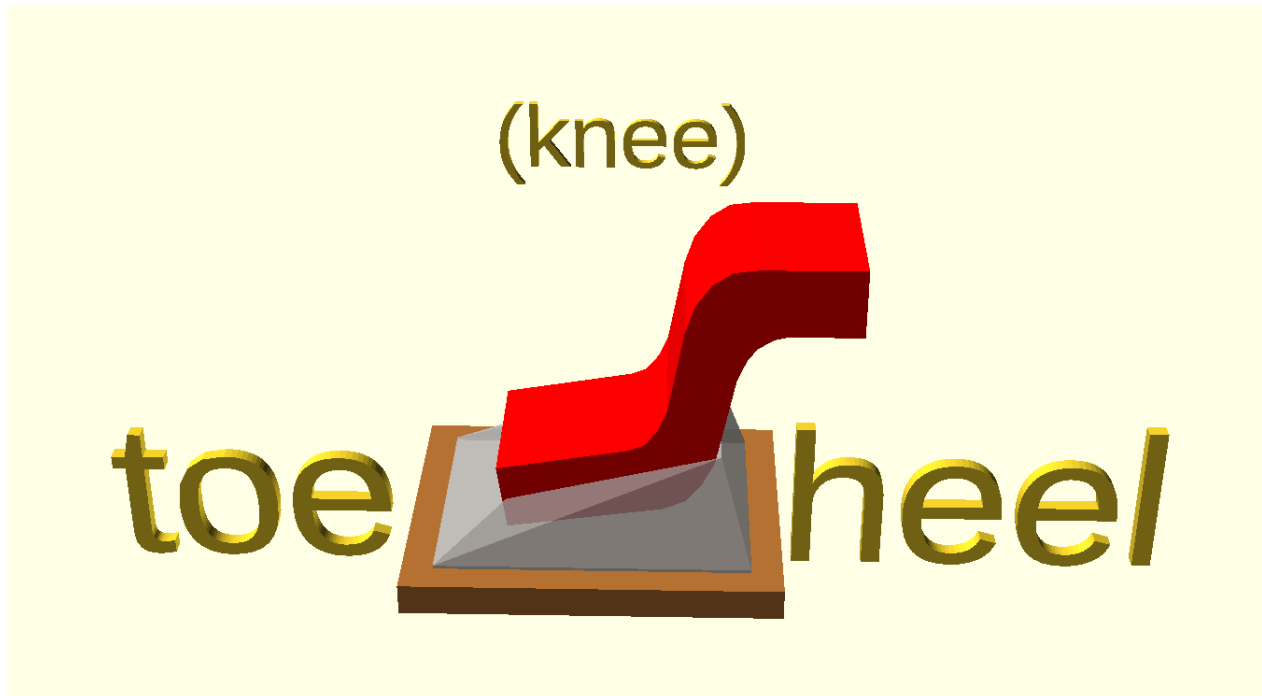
gull-wing lead (SMD) soldered to a copper pad; the grey blob is the solder joint
